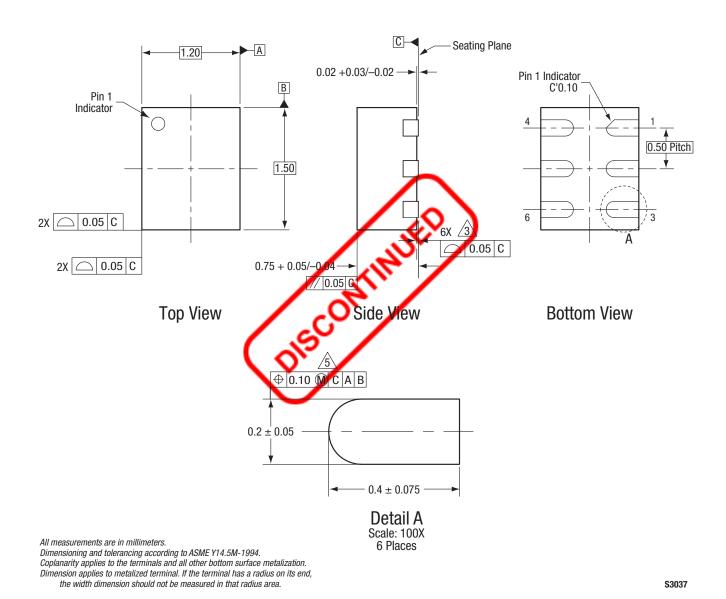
AS211-334 6-Pin DFN Package Dimensions
